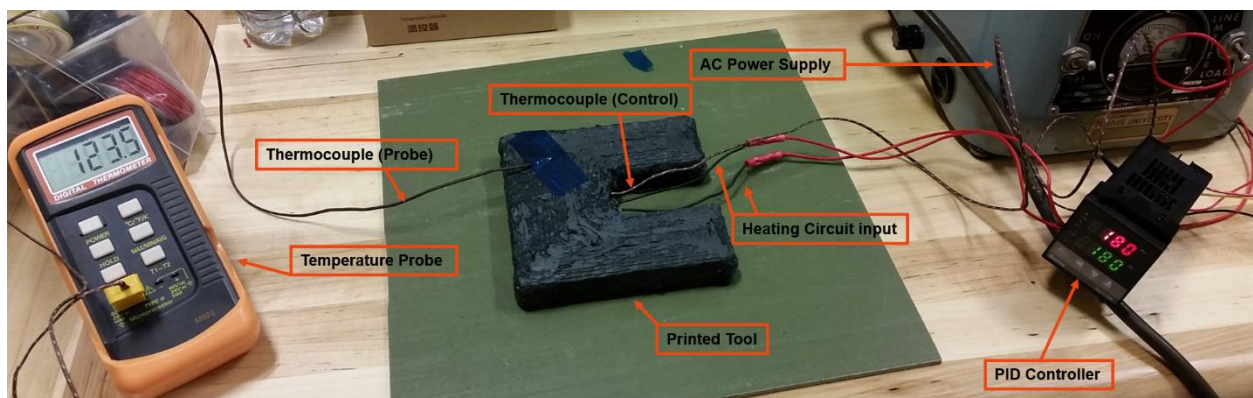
Setup used to test printed mold equipped with a heating circuit
